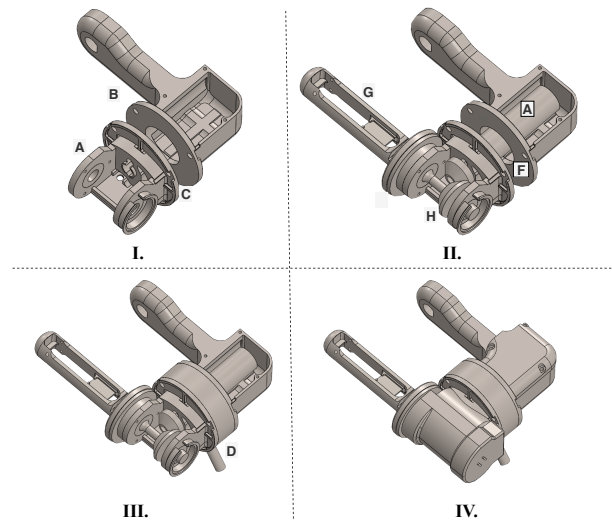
The device CAD model in various states of assembly. I: Un-assembled yaw-link chassis in two parts (A,B) with mounting flange (C). II: Finger grips (G), motor (A) through hole (F), and bevel gears (H) added. III: ATI sensor (D) added. IV: Fully assembled.
